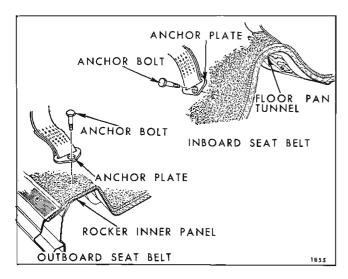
H36—Standard Seat Belt Attachments – All except 68000 Series
